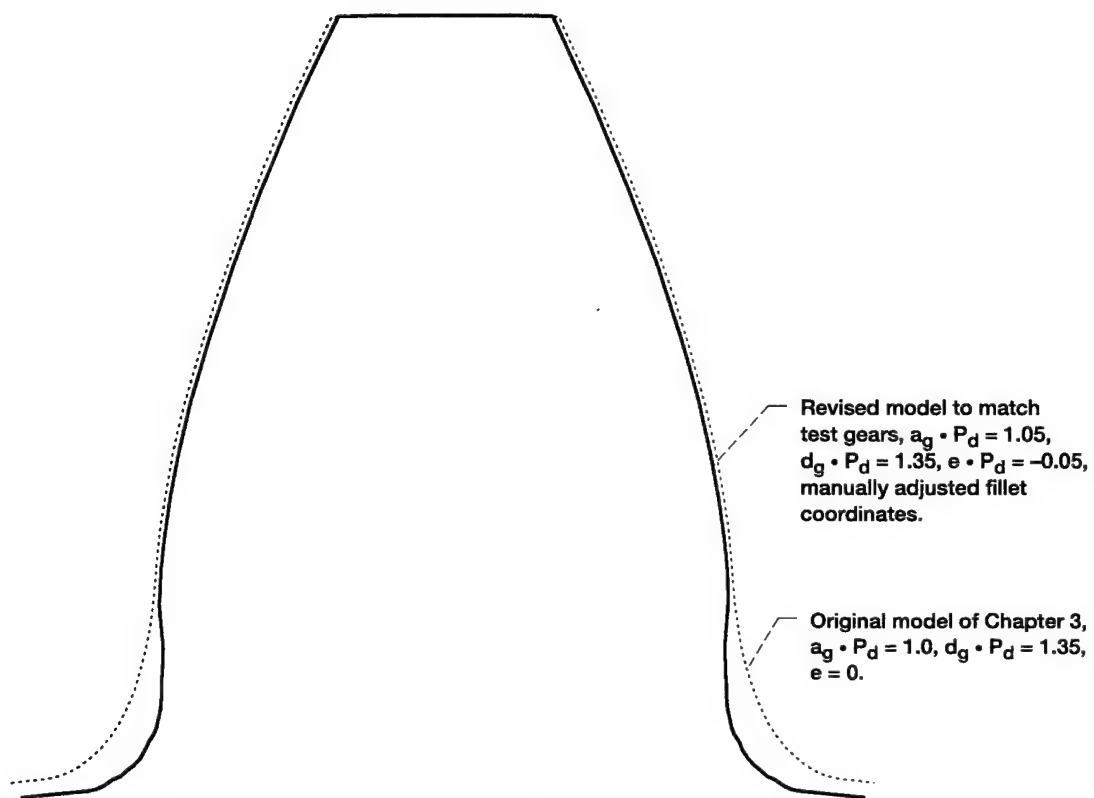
Comparison of original tooth model (Chapter 3) to revised model which matched tooth profile of test gears.
